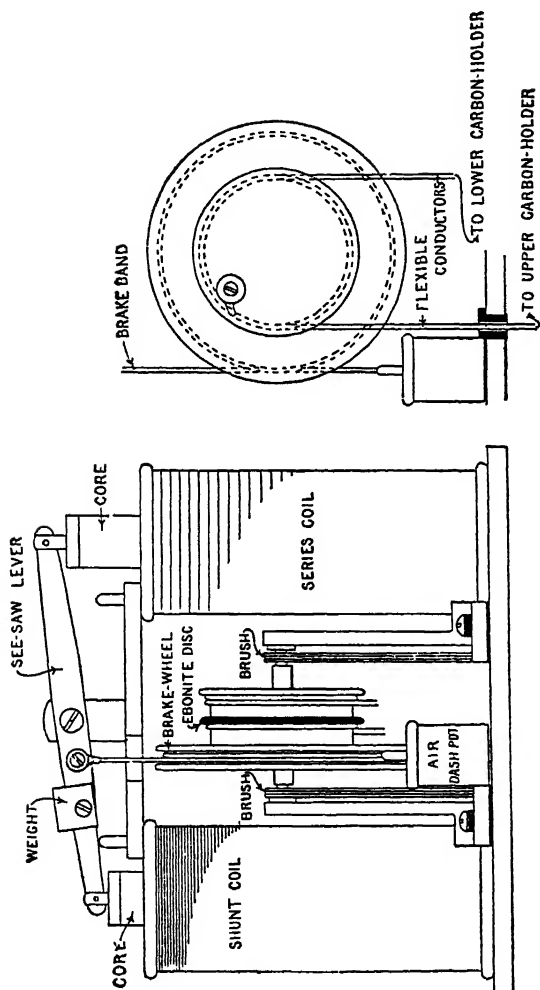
Crompton-Pochin brake-wheel lamp.
